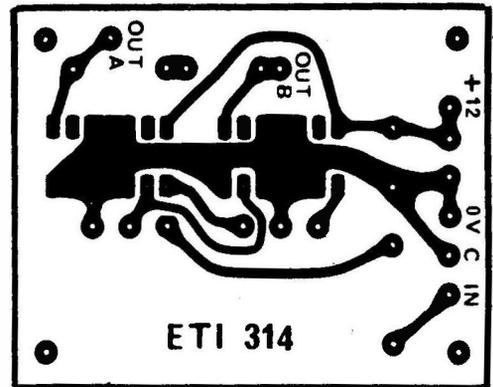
Printed circuit board. Full size 50 x 65 mm.
